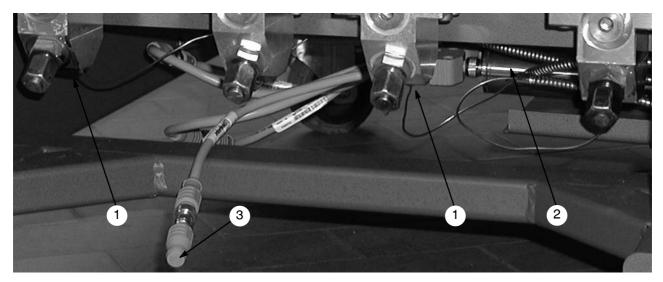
Pressure sensors in the hose connections (right side of melter, refer to Fig. 2-1)
